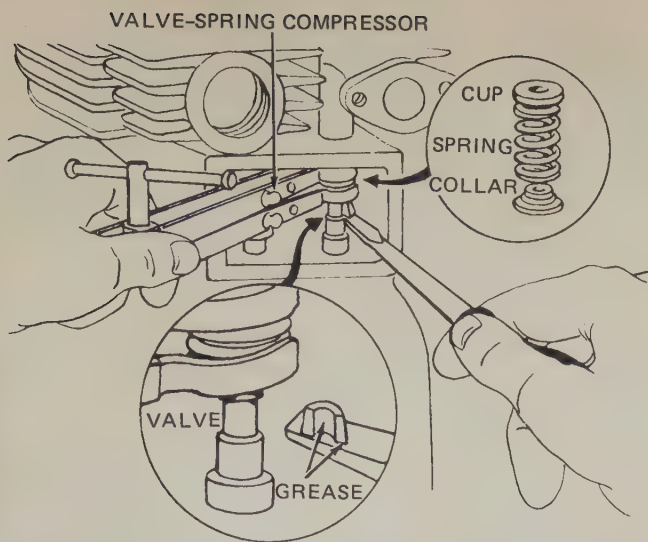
Removing valve spring on engine using split-collar retainer. (Briggs & Stratton Corporation)
